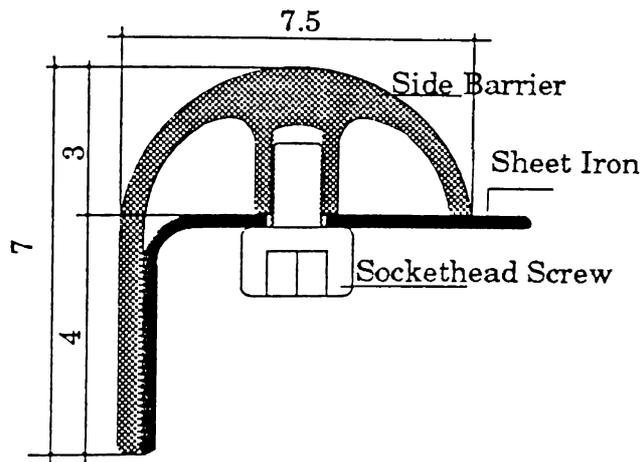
Sections of Fiberglass Barriers and Iron Sheet Platforms.
